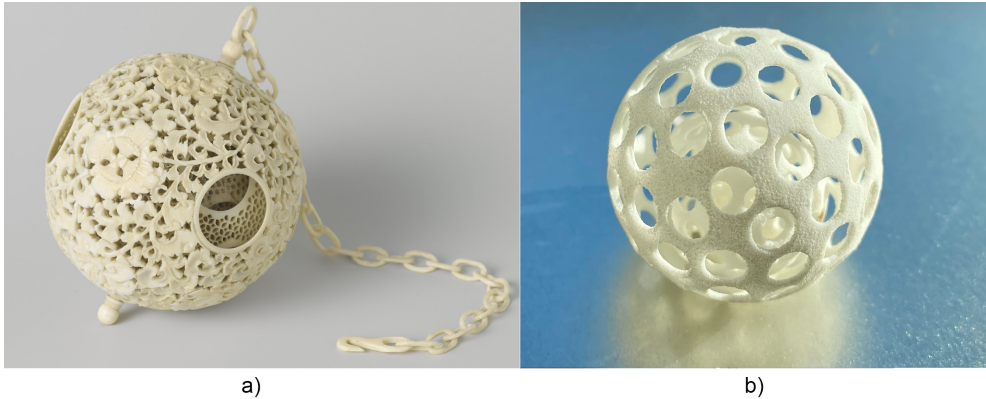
Examples of non-assembly manufacturing. a) Ancient Chinese puzzle ball carved from a single block of ivory [image courtesy of Rijksmuseum (Amsterdam, The Netherlands)]. b) A similar structure of concentric balls 3D printed in a single production step.
